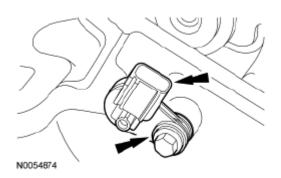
Locating RH CMP Sensor Bolt Courtesy of FORD MOTOR CO.
